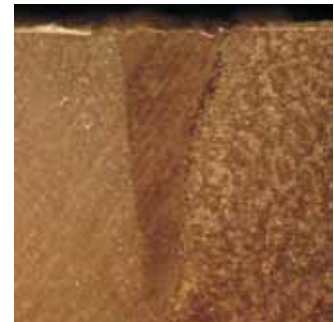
, 70: The problem could be solved by limiting weld depth. Welding with case layer and without interlayer material is feasible.
